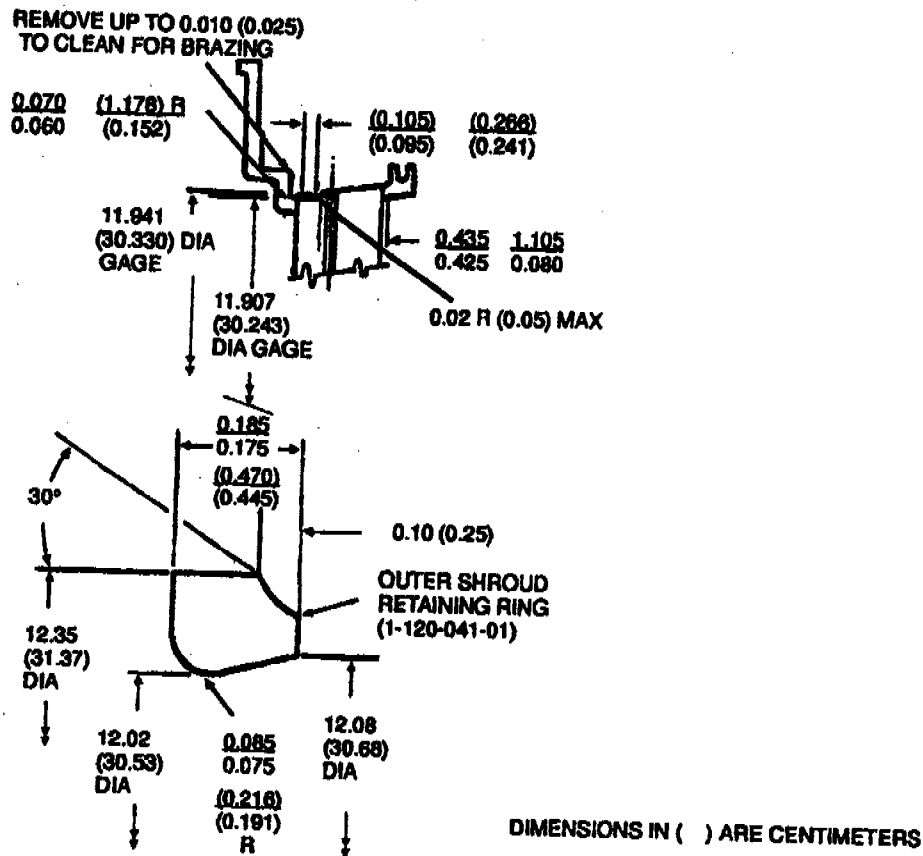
Machining Preparations for Outer Shroud Retaining Ring.
